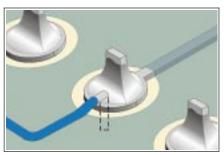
Acceptable* Wire soldered into plated-through hole on solder side.
